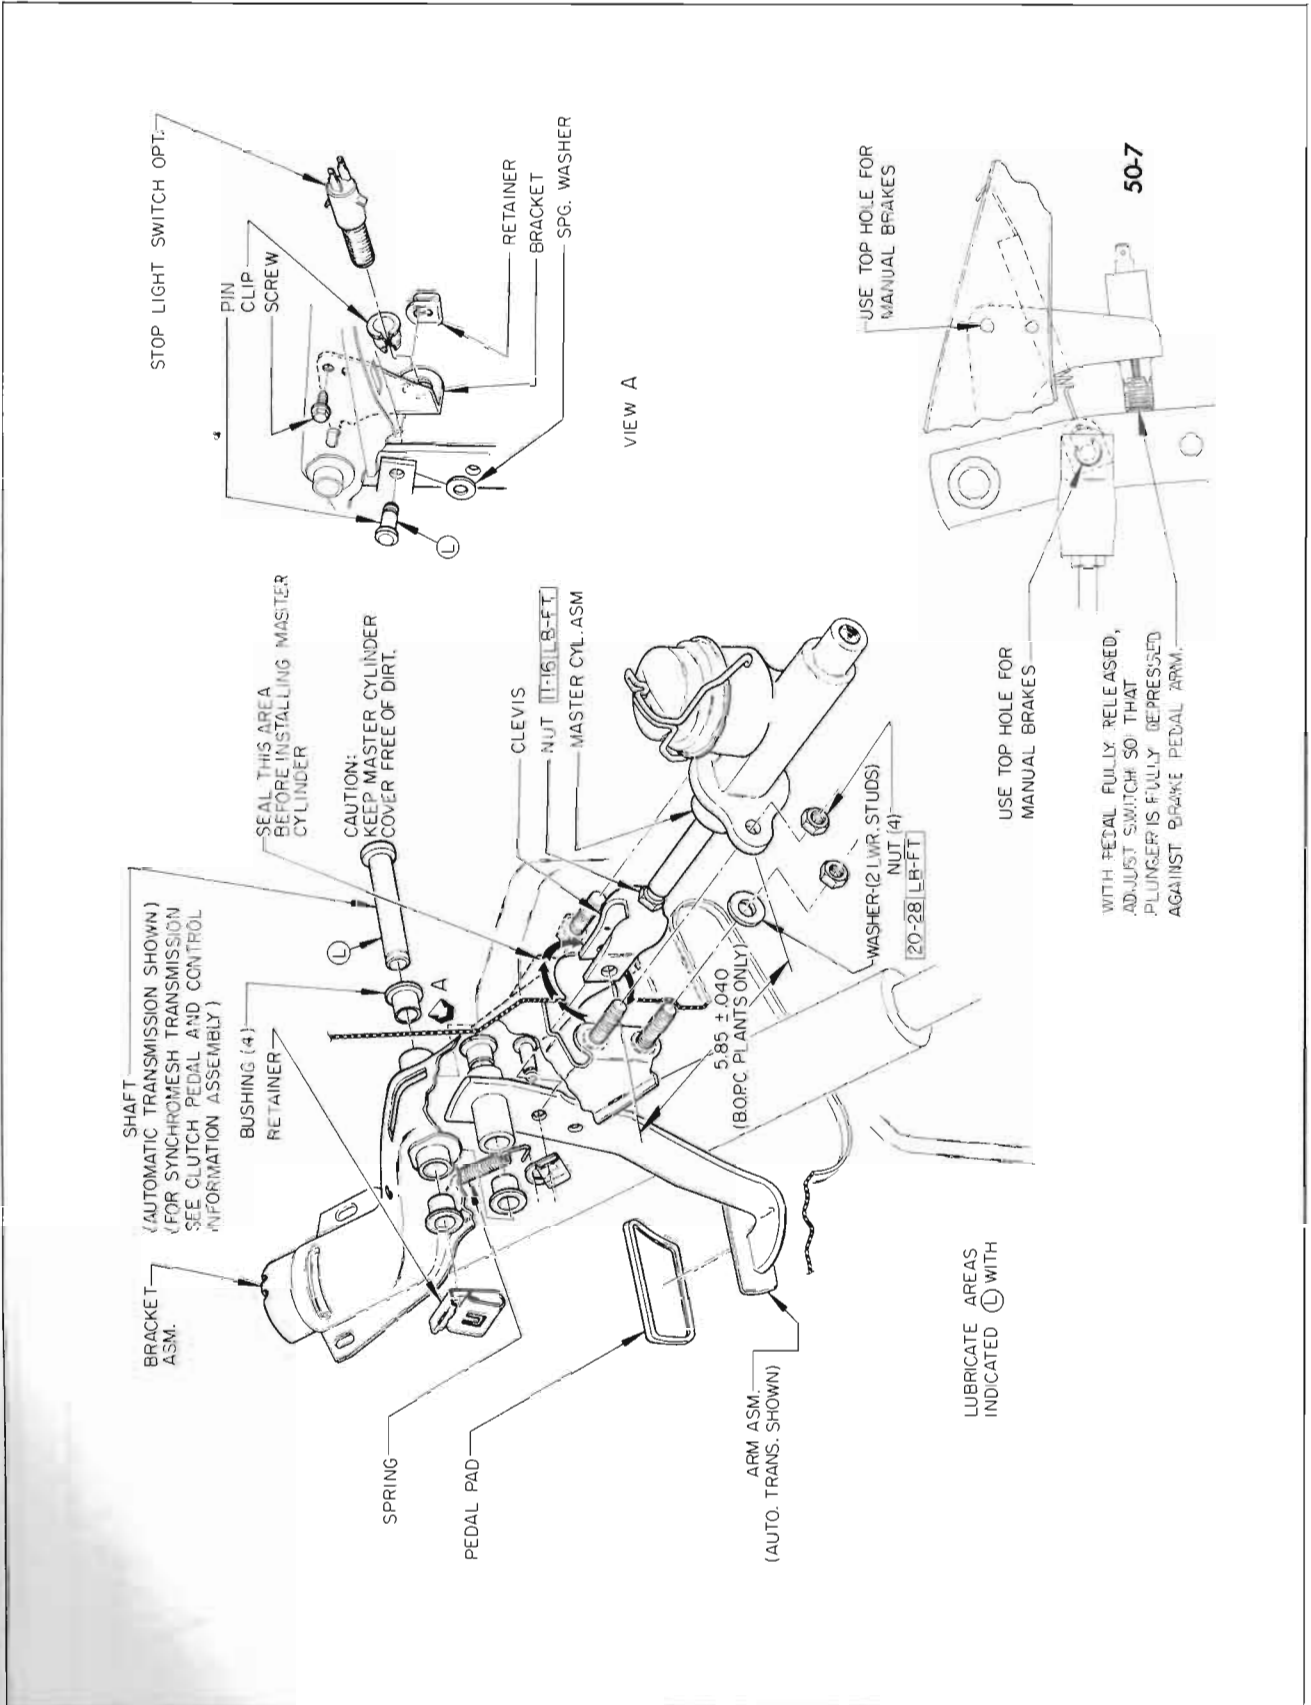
Mounting of Brake Pedal and Master Cylinder
